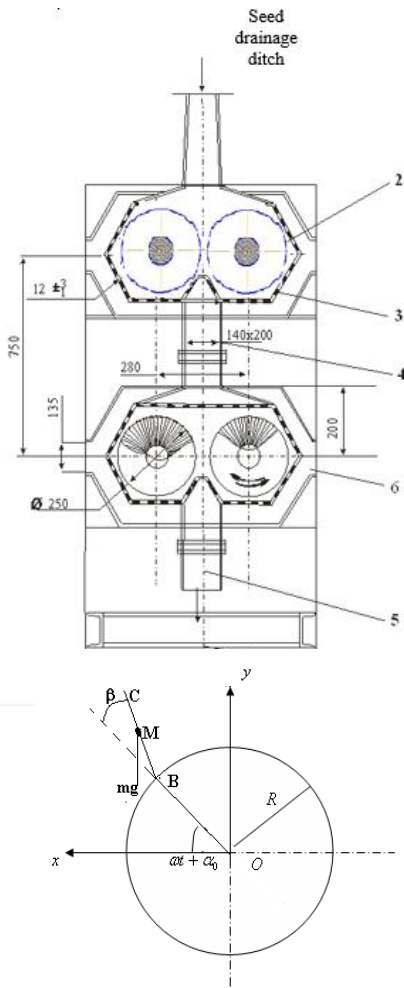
Side view of the seed delinting machine, improved according to the developed technical solution
